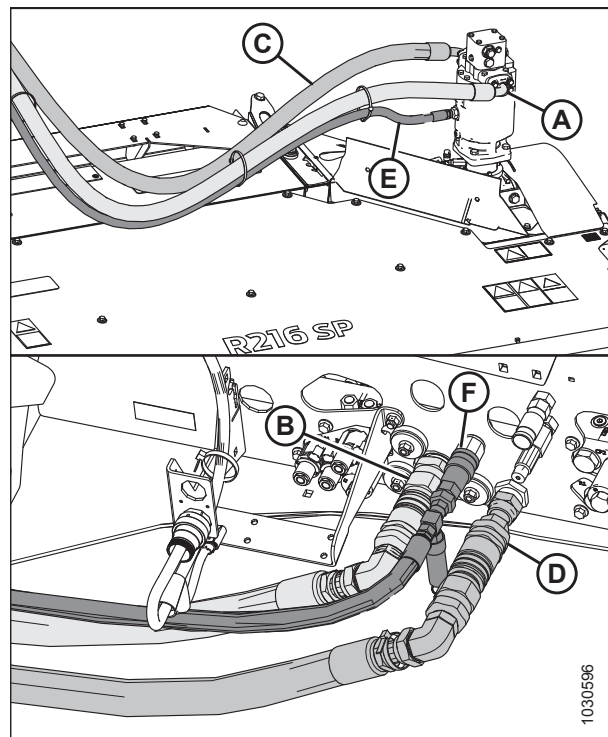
Hydraulics and Electrical – Rotary Disc Configuration with Quick Couplers Installed
